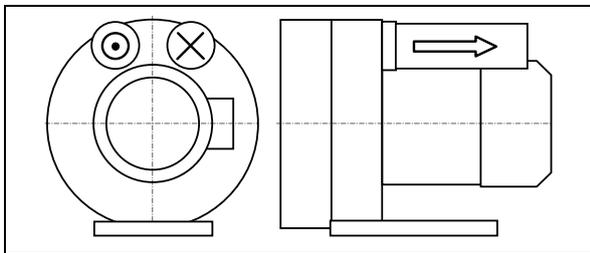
2BH1840-7G... (two-impeller pump-motor unit with double-flow design)
